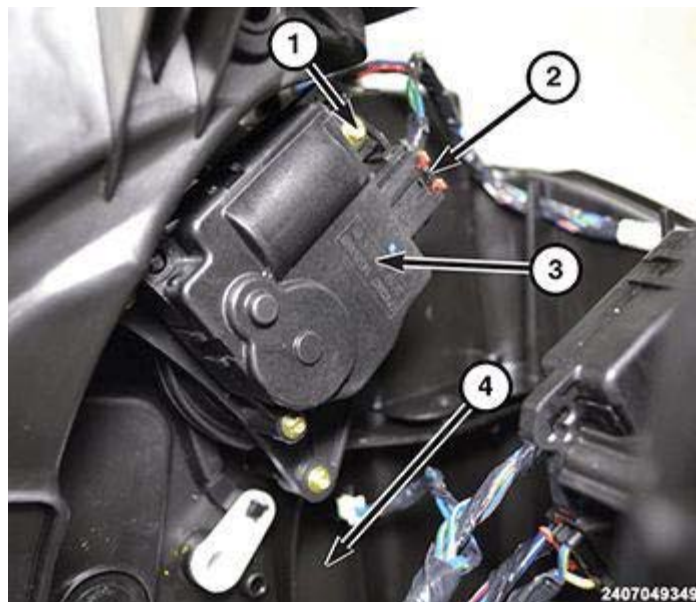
Blend Door Actuator, Distribution Housing, Wire Harness Connector & Screws
